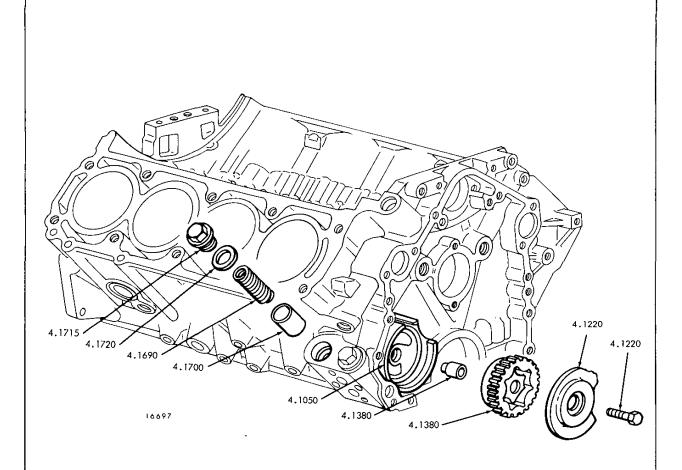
A OIL PUMP & OIL PRESSURE REGULATOR VALVE
